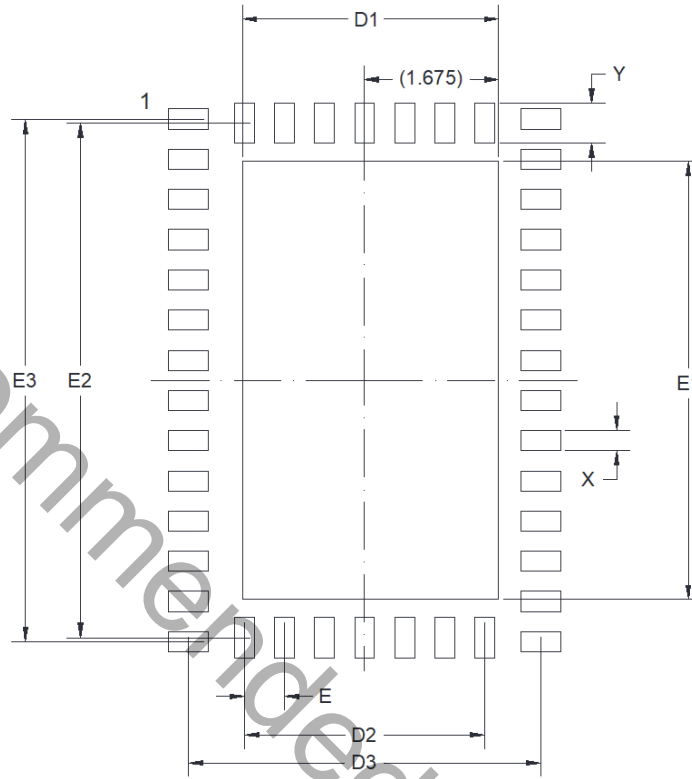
LGA-42 PCB Land Pattern (Si1010/1/2/3/4/5-C-GM2)
